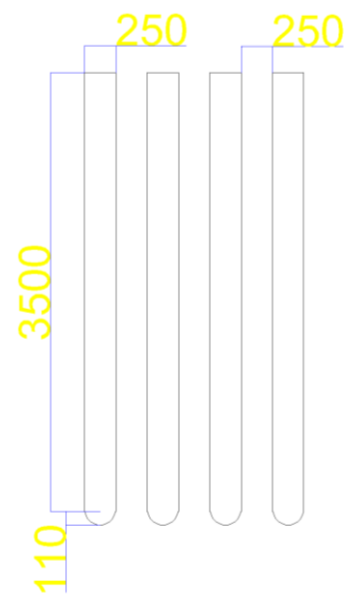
Dimensions (in μm) of probing pattern of the PCB probe
